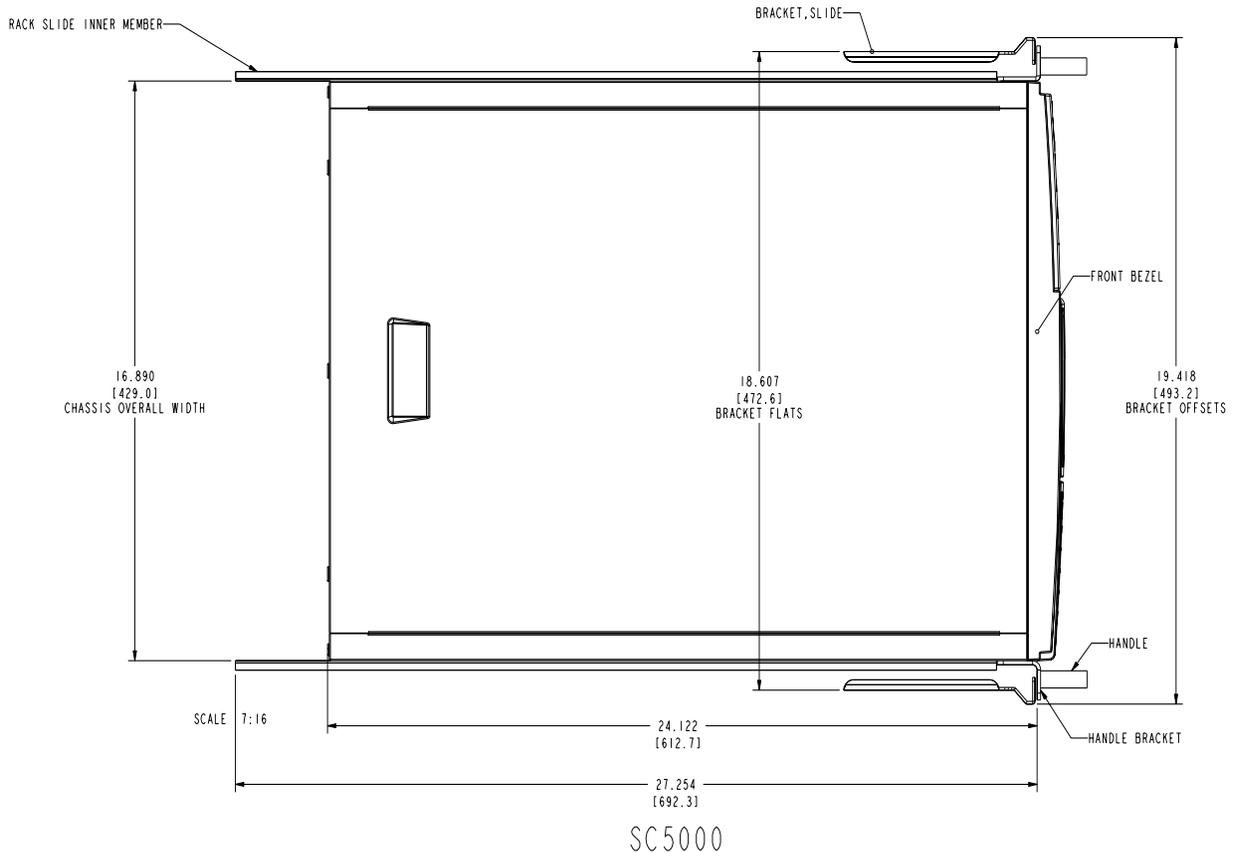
SC5000 Chassis and AHDRACK kit dimensions
